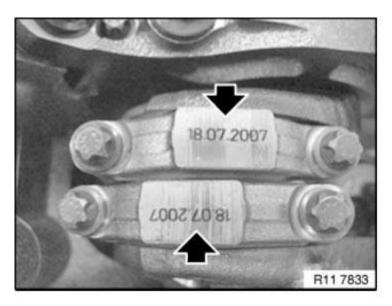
Locating Stamped Dates On Connecting Rod Bearing Cap Courtesy of BMW OF NORTH AMERICA, INC.
